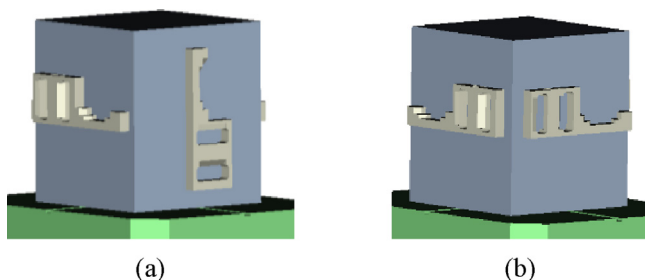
Tombstone fixture – setup 1, 2 (a) and 3, 4 (b).
